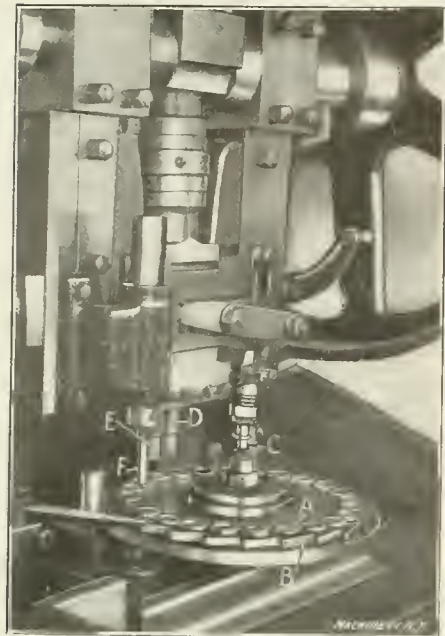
Expanding Machine for partially forming the Head on the Brass Cap
